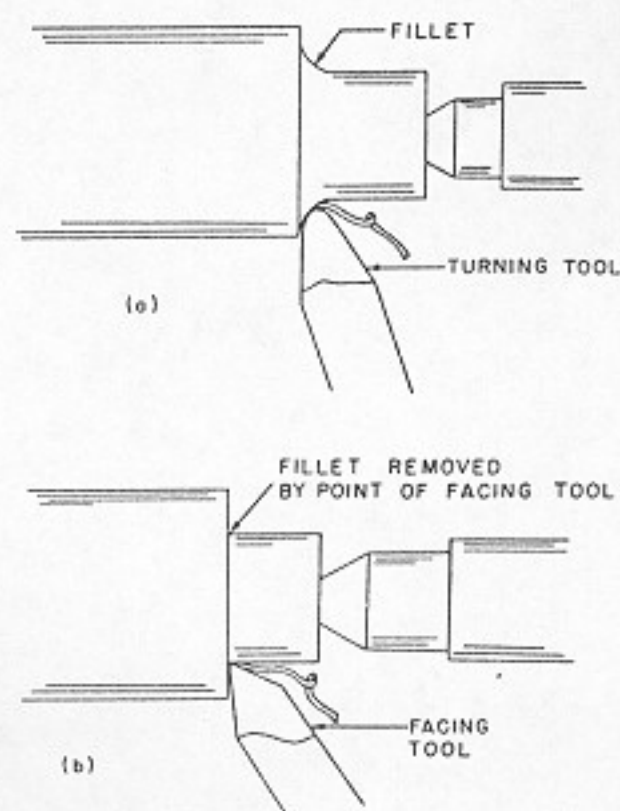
When removing the radius with the facing tool, be careful that you do not cut deeper at the shoulder than the finish diameter.
